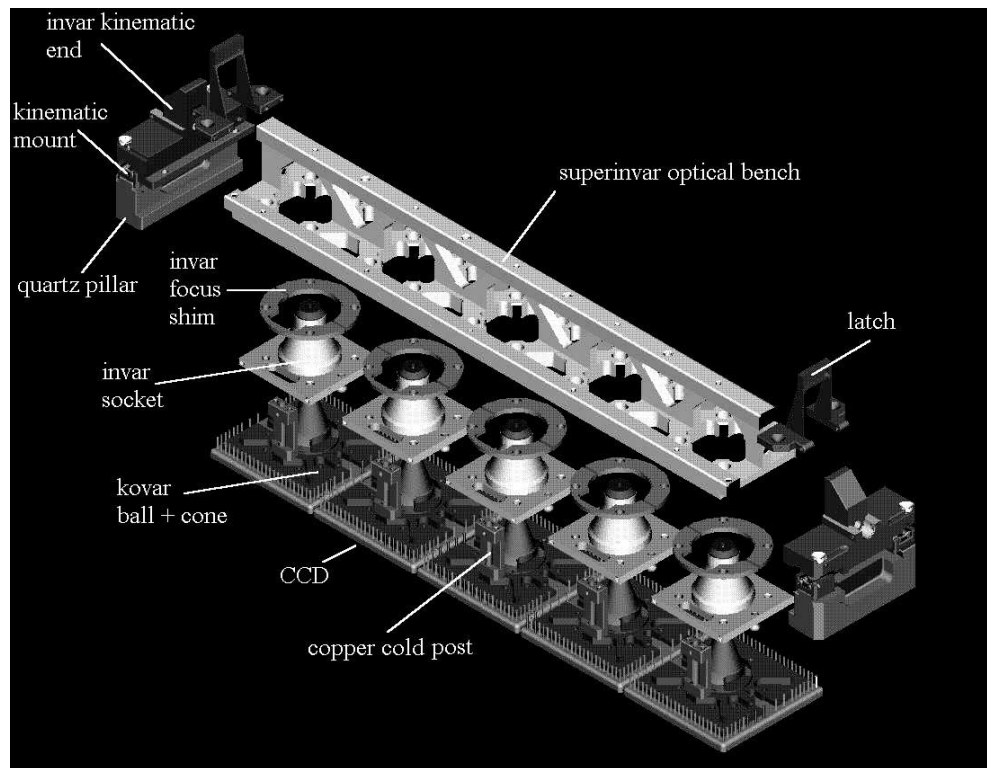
Pro/Engineer CAD representation of an exploded view of the Tbar assembly. Refer to the photographs in Figs. 7 and 12.
